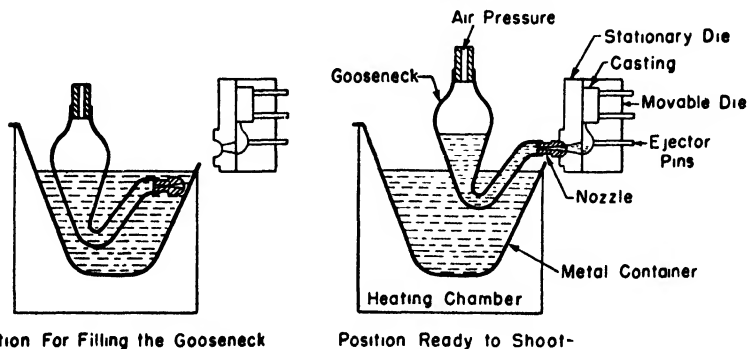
Typical gooseneck type die casting machine. The gooseneck, metal container, heating chamber, and die carriage are parts of the same machine.
